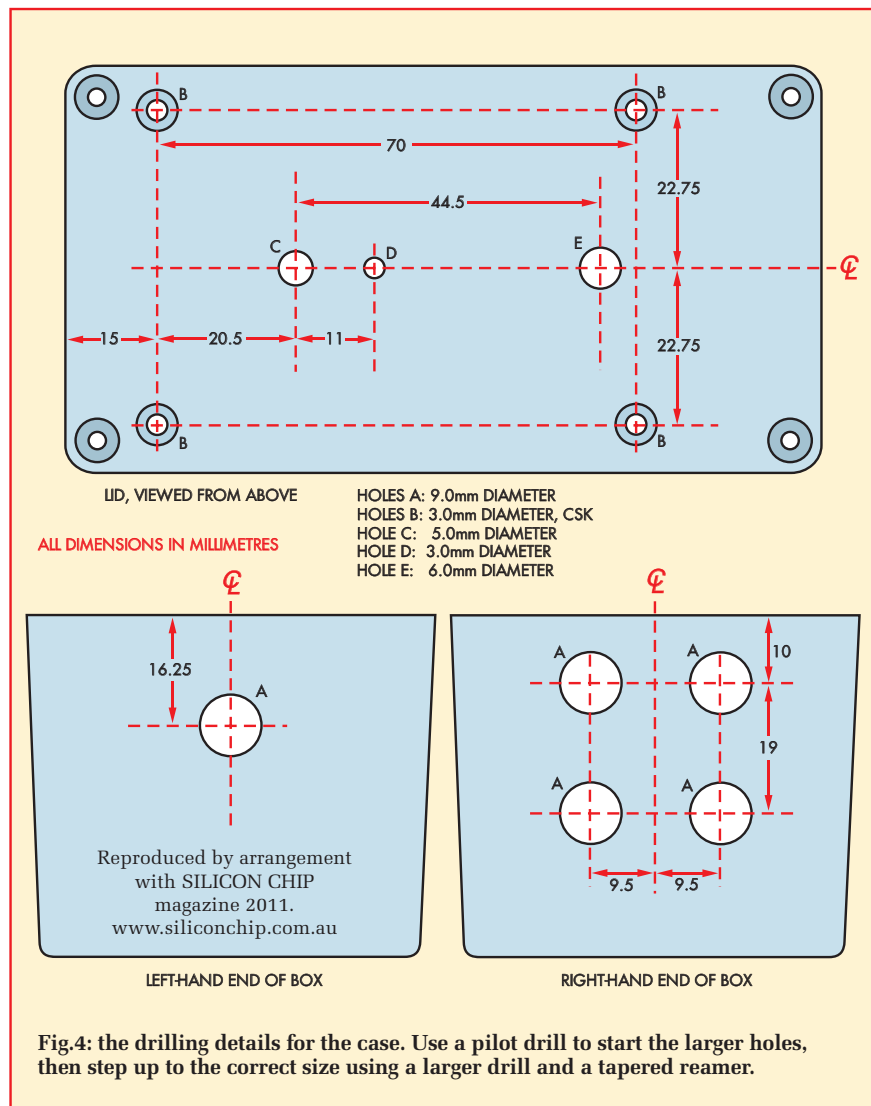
the drilling details for the case. Use a pilot drill to start the larger holes, then step up to the correct size using a larger drill and a tapered reamer.
